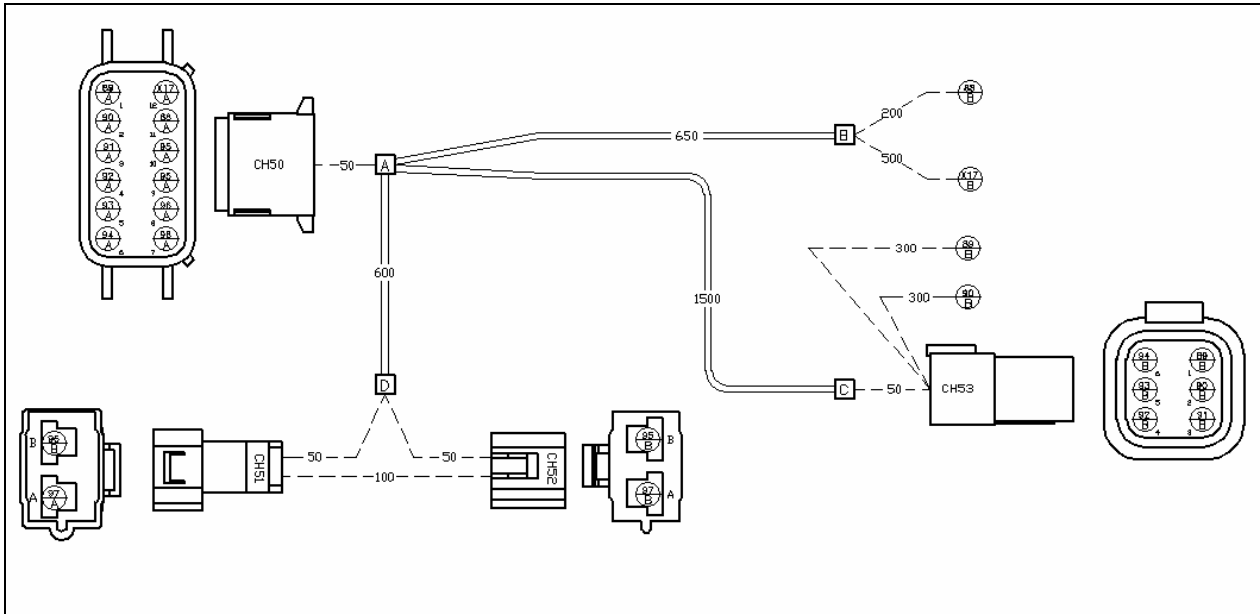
PROTECTION MODULE CABLE ASSEMBLY
